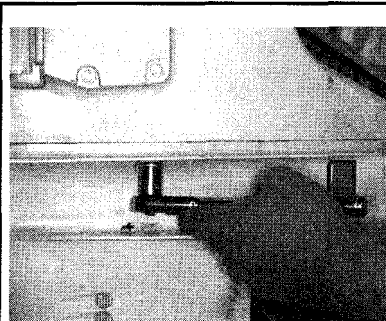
two on each side, securing the lower unit to the exhaust housing
